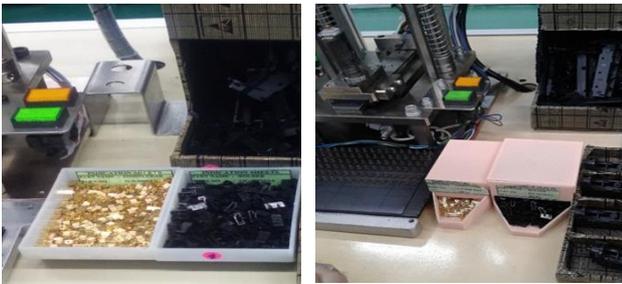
Old layout of parts container and new layout of parts container for Assembly station process number 3.
